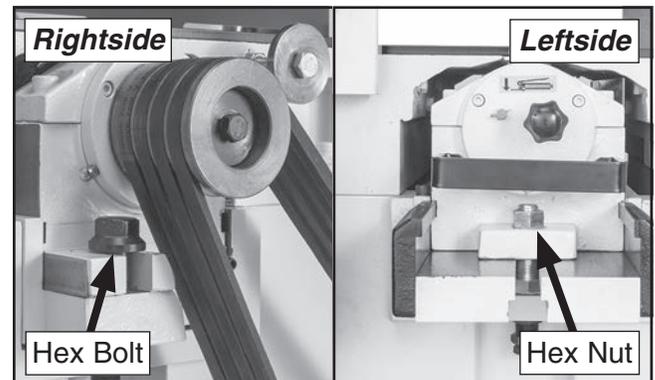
Location of lower cutterhead hex bolt and hex nut.
